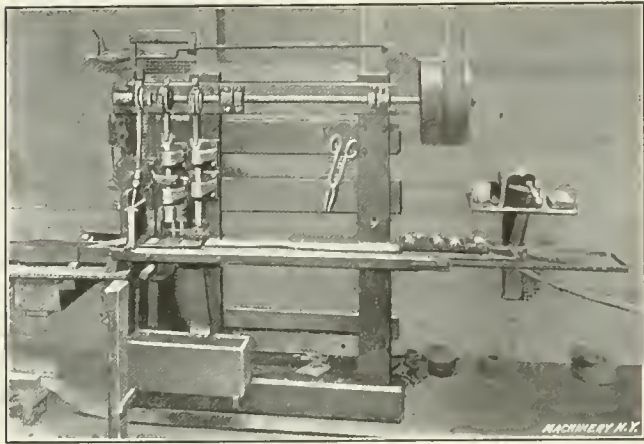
Special Automatic Machine for Edging, Punching and Shearing off the Fins
